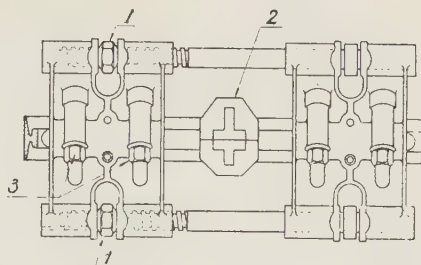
Thermit-pressure welds with inserted plate. Screw press for giving the forging pressure.
